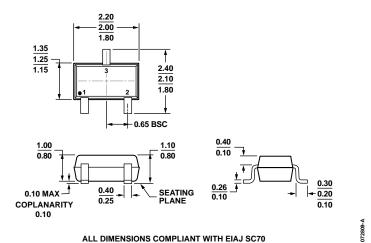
3-Lead Thin Shrink Small Outline Transistor Package [KS-SC-70] (KS-3) Dimensions shown in millimeters
